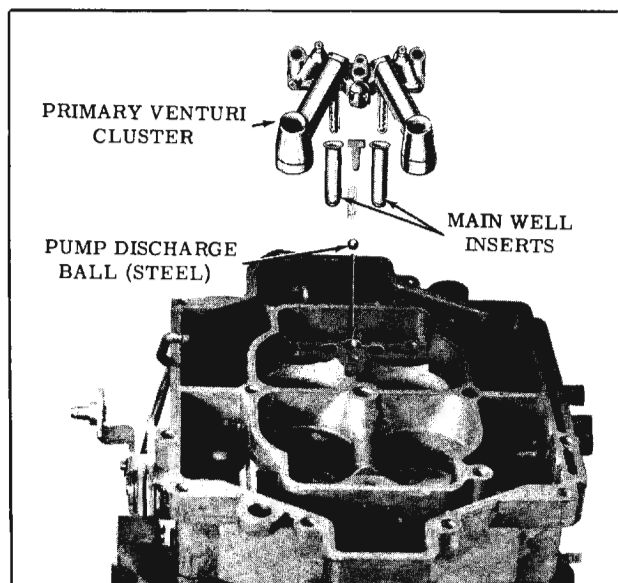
Pump Discharge Spring, Guide and Main Well Inserts
